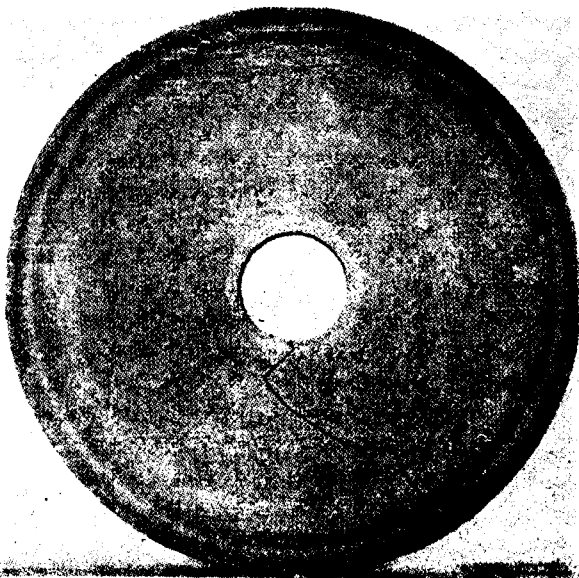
This 15 ¹/₂-in. diam. roll failed from fatigue fracture originating in defect on bore.
